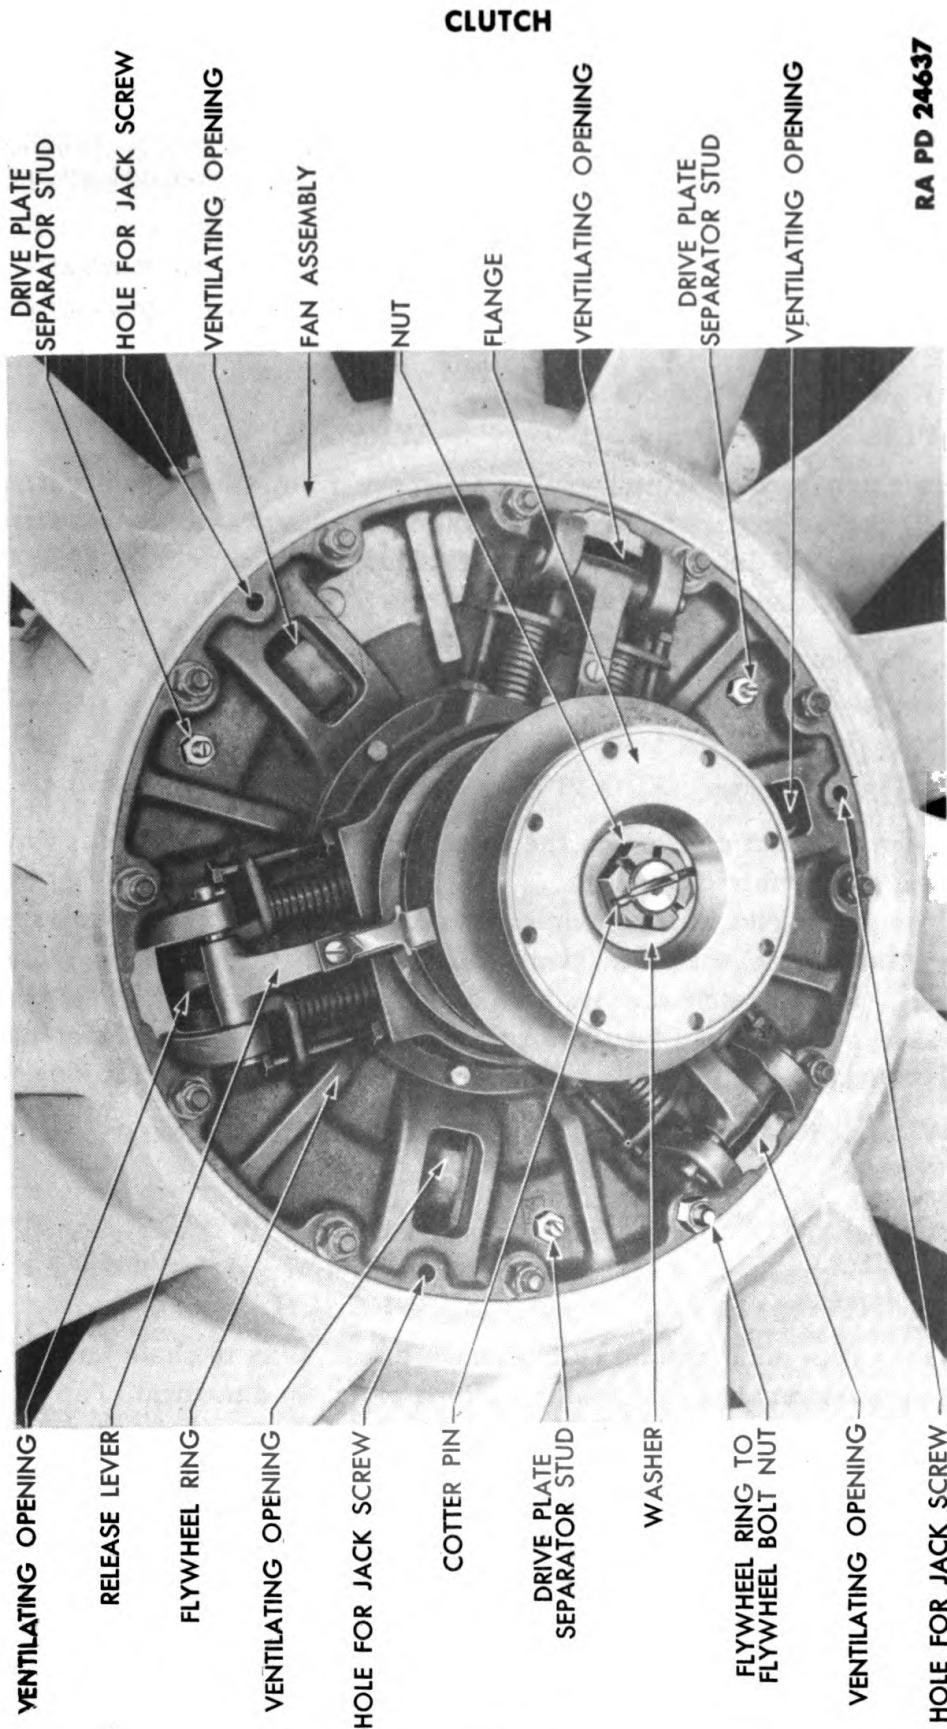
Clutch and Fan Assembled (Ventilated Type)
